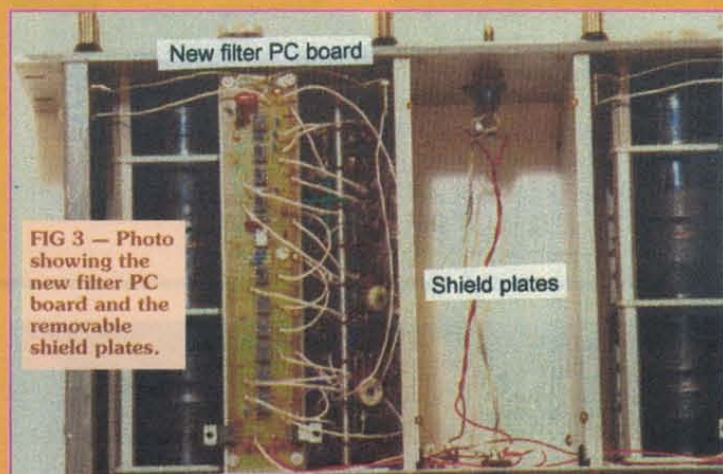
Photo showing the new filter PC board and the removable shield plates.
